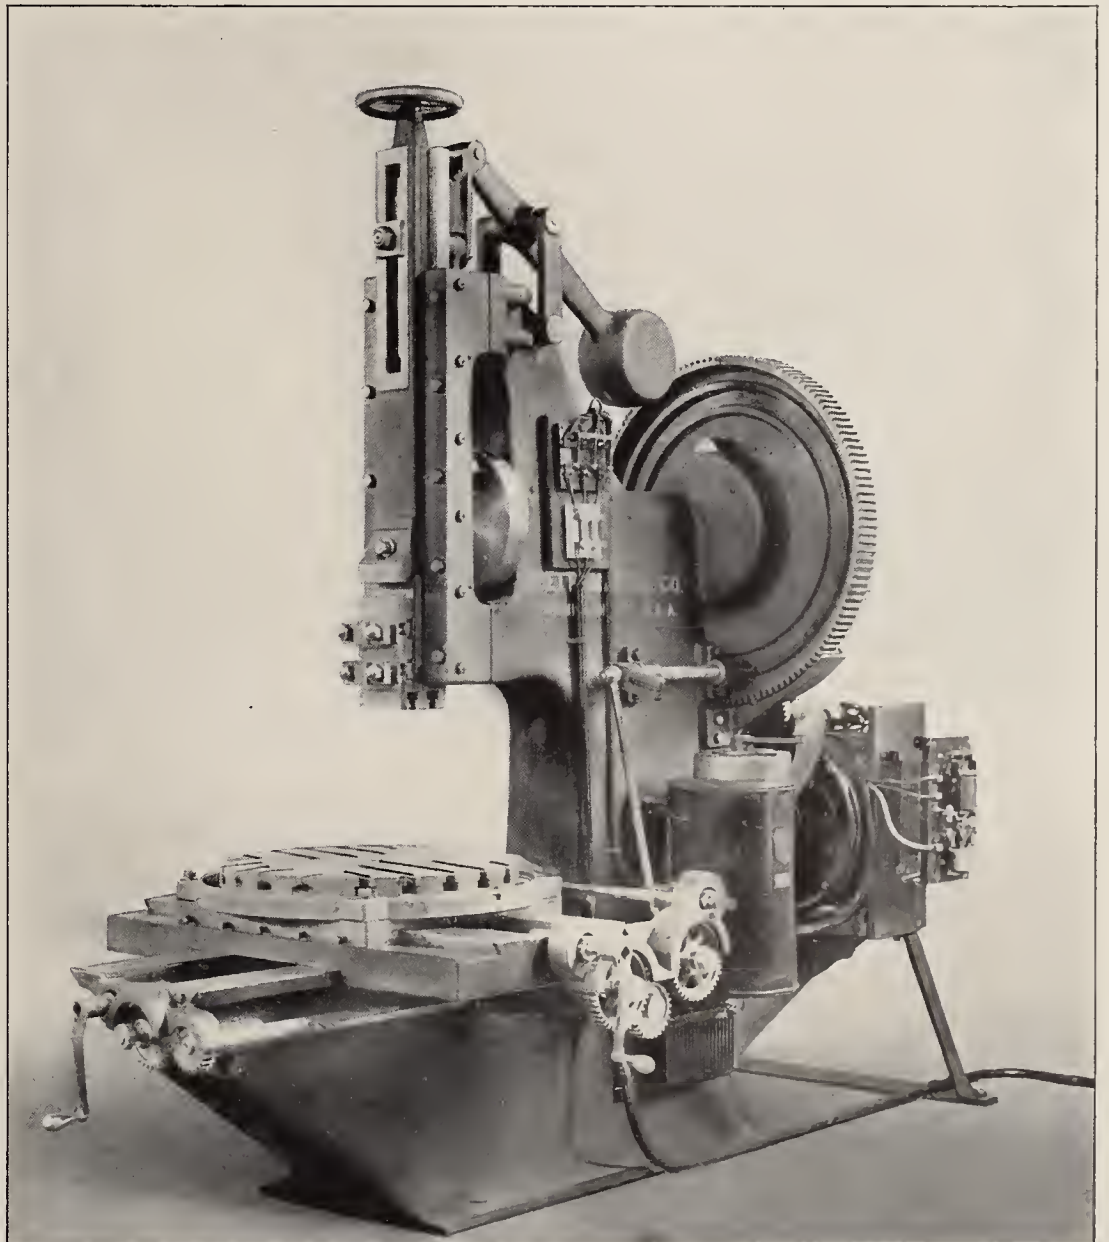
A BULLOCK MOTOR OPERATING ON THE THREE-WIRE, THREE-VOLTAGE SYSTEM, DRIVING A SLOTTING MACHINE BUILT BY THE BETTS MACHINE COMPANY, WILMINGTON, DEL.
